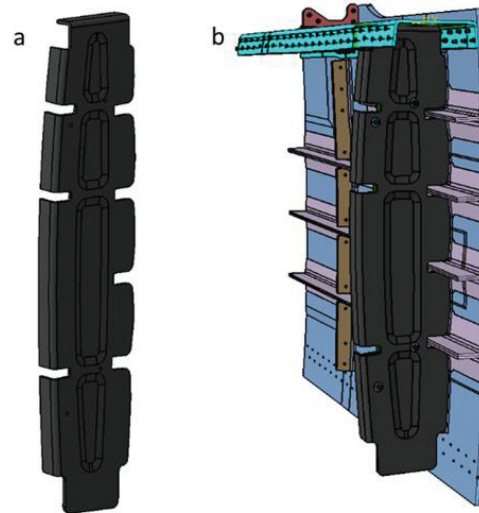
(a) Rib product (b) cross section of front spar, rib and lower panel
